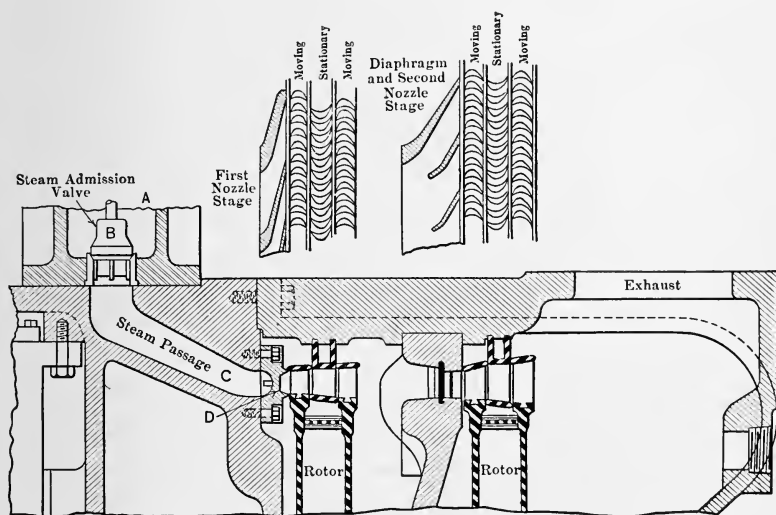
Arrangement of Nozzle and Blades, Curtis Turbine.
